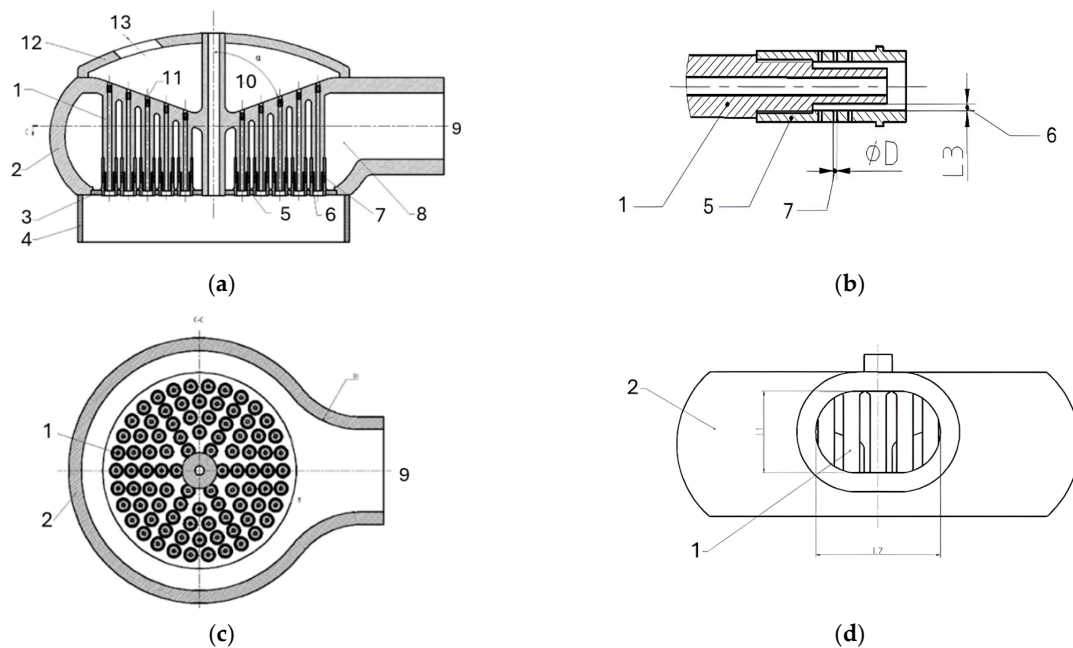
Mixing head design with a central igniter tube for the pre-burner. (a) Mixing head embodiment cross sectional view; (b) Side view of a single injection element; (c) Cross sectional view of mixing head of (a); (d) Right view of the mixing head. (1)-Oxidiser injection element; (2)-Mixing head dome structure; (3)-Injection plane; (4)-Combustion chamber; (5)-Fuel injection element; (6)-Injector spacing; (7)-Radial inlet hole; (8)-Fuel cavity; (9)-Fuel inlet; (10)-Oxidiser cavity; (11)-Oxidiser distributor; (12)-Injector house cover; (13)-Oxidiser inlet. Reproduced from CN Patent No. 112746910A in Ref. [198].
